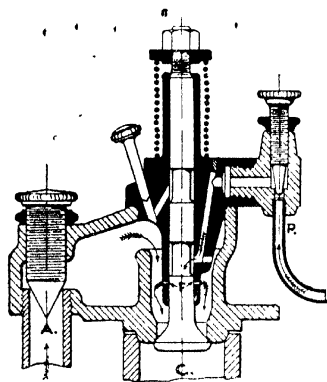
Gravity action snifting-valve carburettor Crossley Hulley
